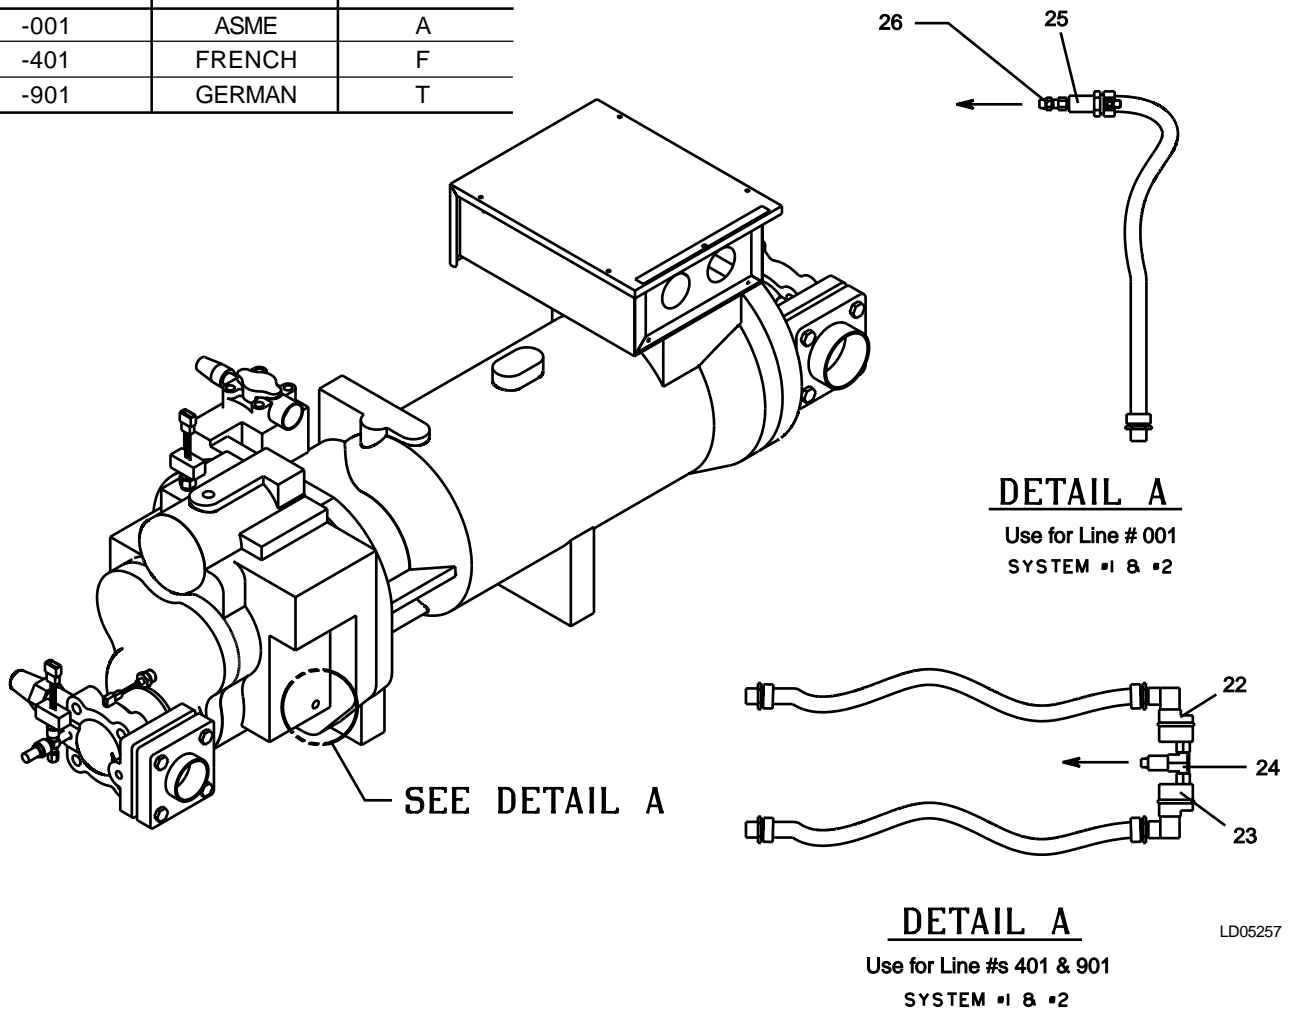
(CONT'D) – RELIEF VALVES AND HP CUTOUT SWITCH (REF. TABLE 5, PAGE 12)
